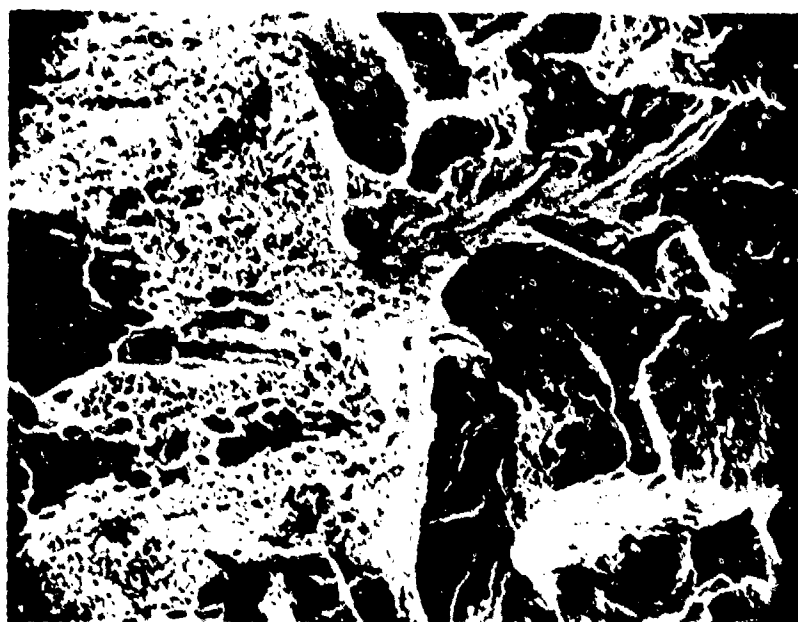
SEM photograph of the fracture surface of tensile specimen No. 4 (a) which failed in the weld zone. The area shown has features typical of the fracture surface away from the "flat spot" parent rail metal (b) pulled to fracture in tension.
